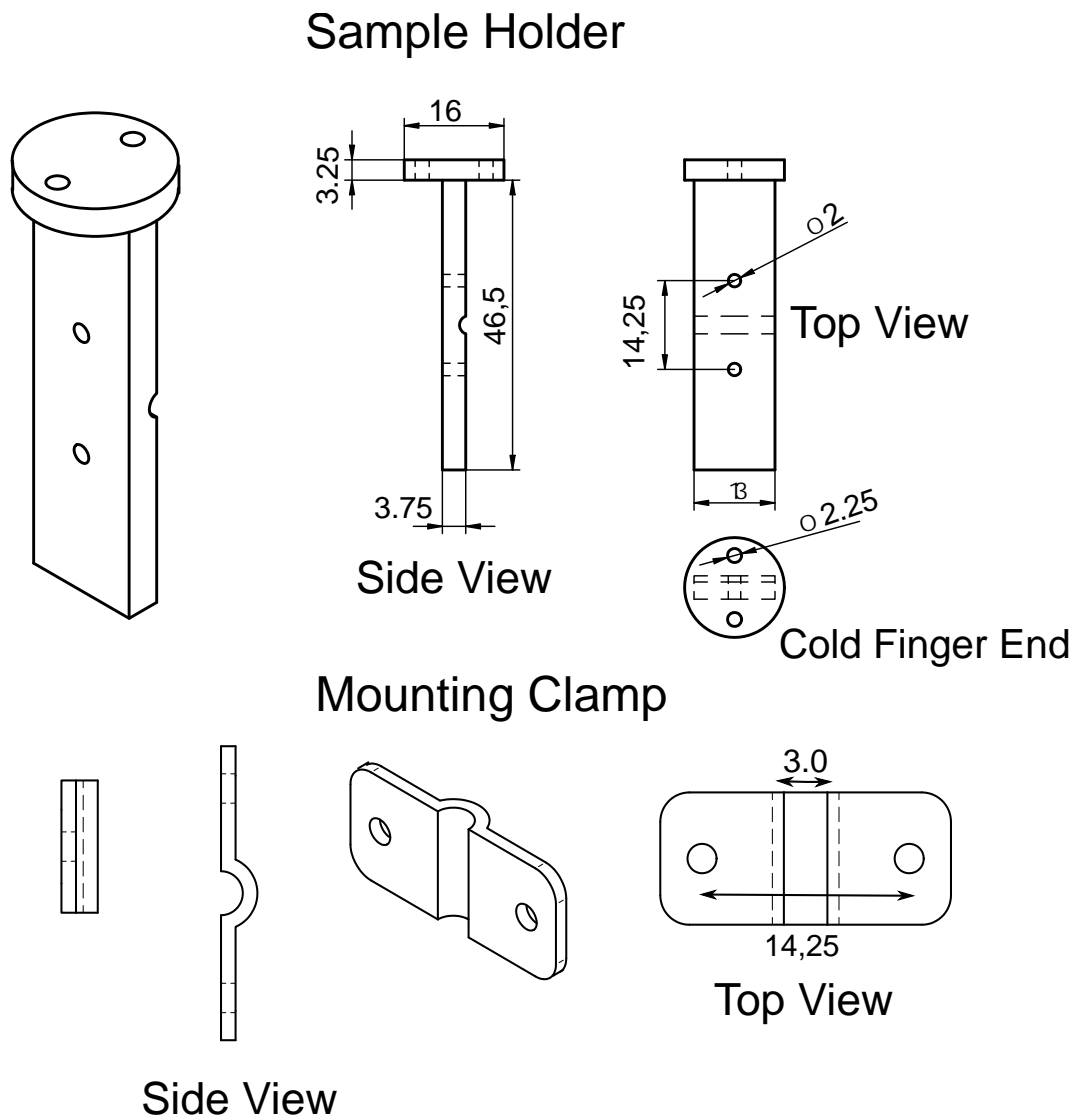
Design and drawings of sample holder and mounting clamp. All the dimensions are in millimeters.
